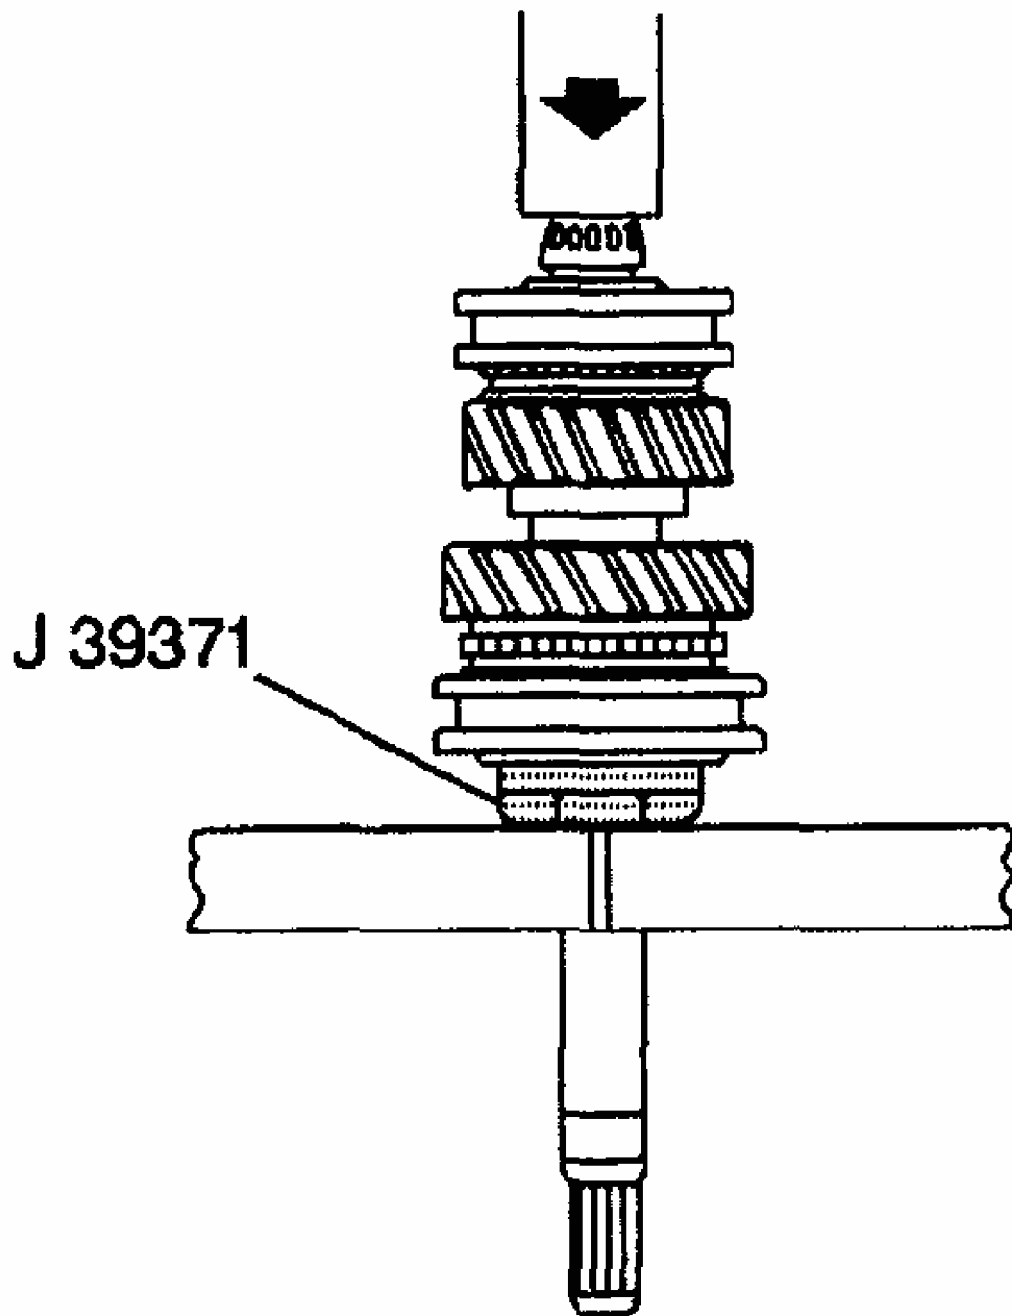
Installing 2nd Speed Gear Caged Needle Bearing & Bearing Spacer
